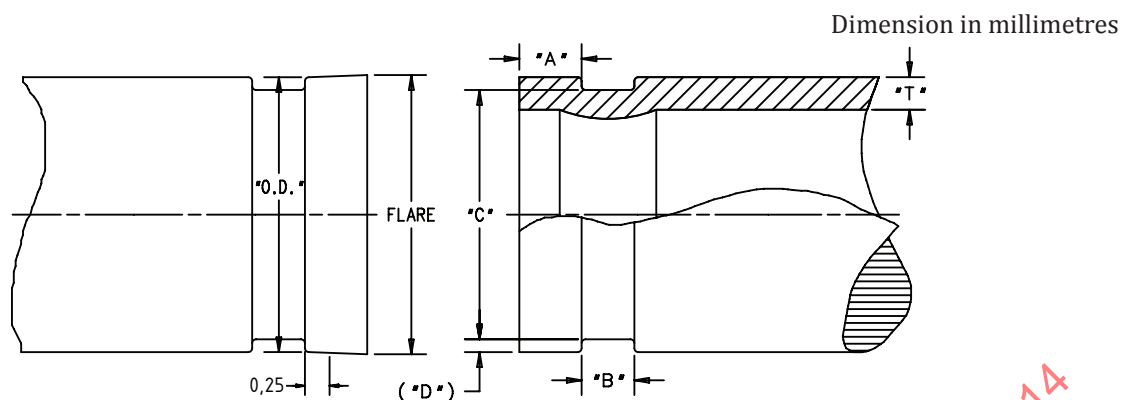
Roll grooved-end dimensional reference points from Table 1
